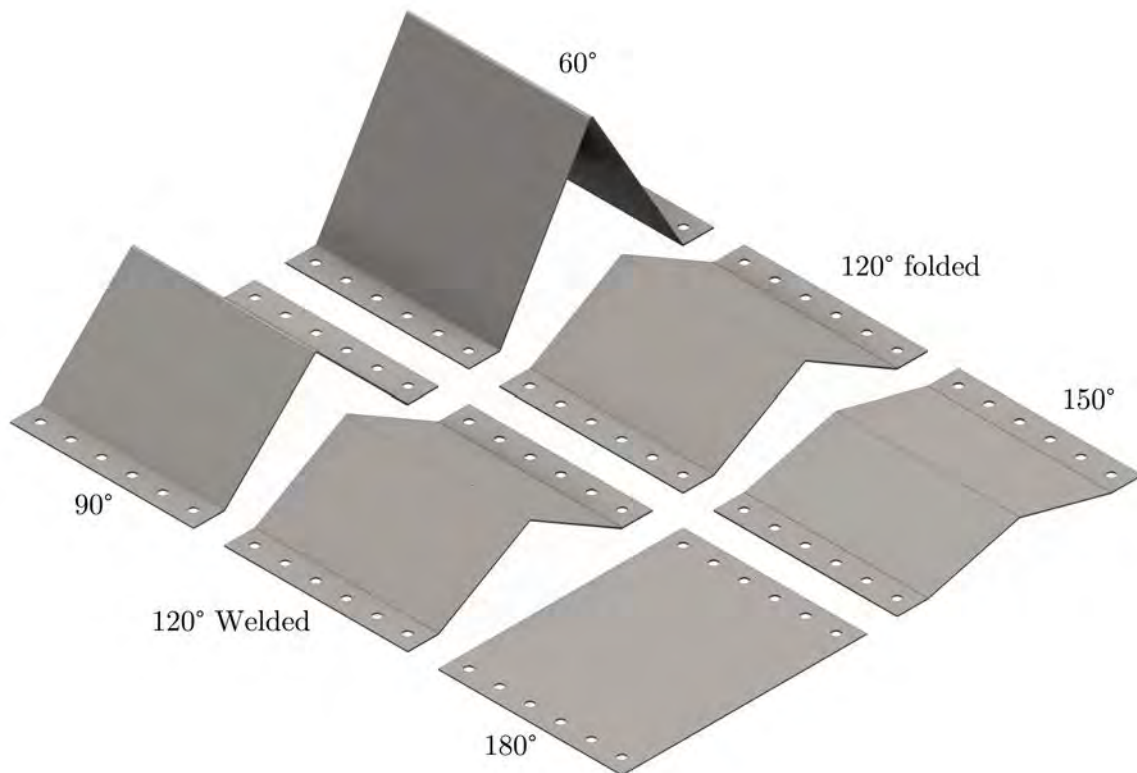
CAD renderings of the V-plates tested by Pickering [6]
